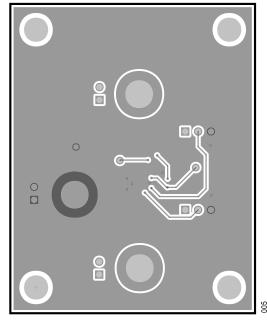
ADPL40505A EV kit PCB Layout— Bottom Layer (Top View)
